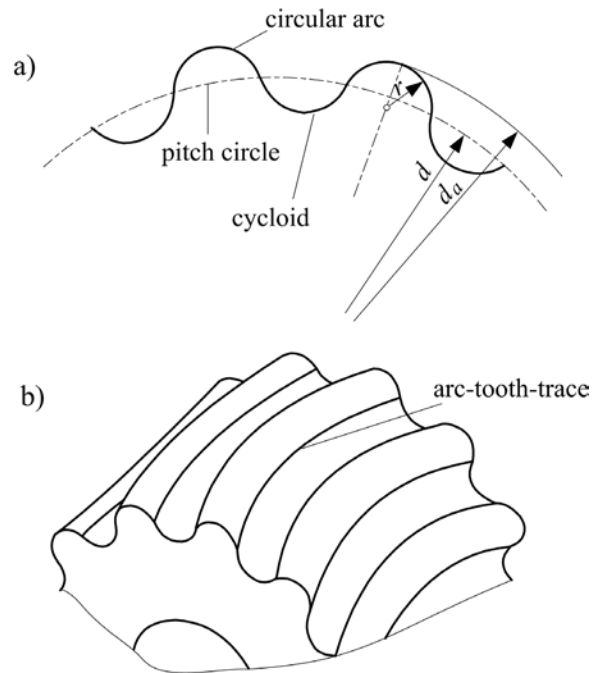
Arc-tooth-trace cycloid gear; a) tooth profile, and b) arc-tooth-trace; adapted from [43]
